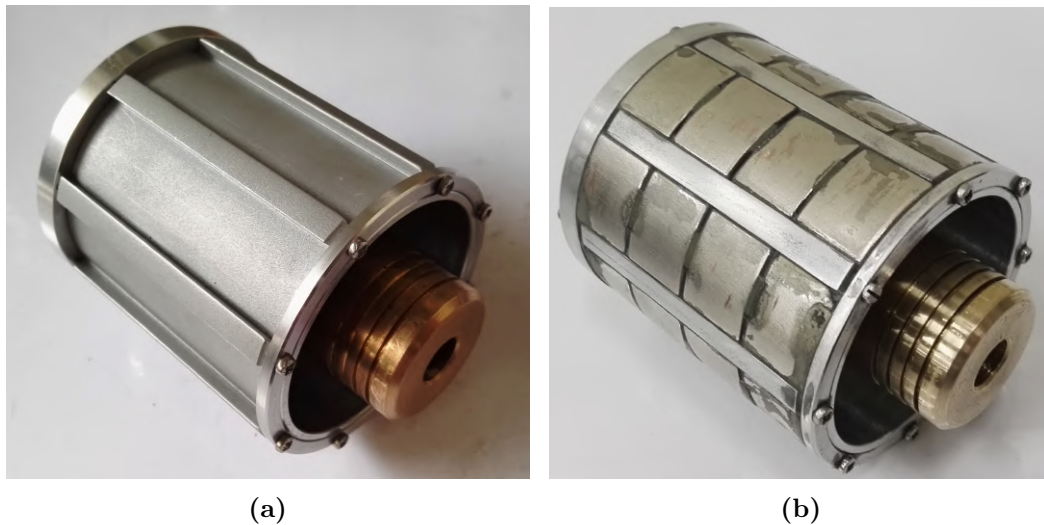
Power piston assembly, showing (a) the piston and magnet train plunger before assembly with arc magnets, and (b) the piston and magnet train after assembly and glueing of arc magnets (notice the relatively poor quality of assembly and glueing)
